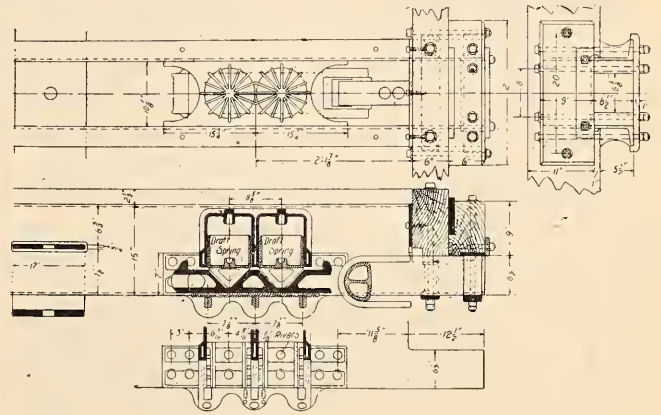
FRICTION DRAFT GEAR, C., M. & ST. P. RY., COAL CAR.
